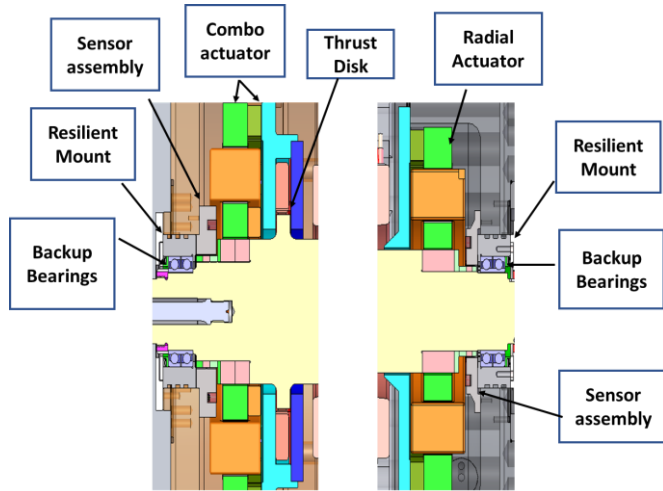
Detail of magnetic bearing endbell assemblies, showing the combination actuator endbell (left) and radial actuator endbell (right)
